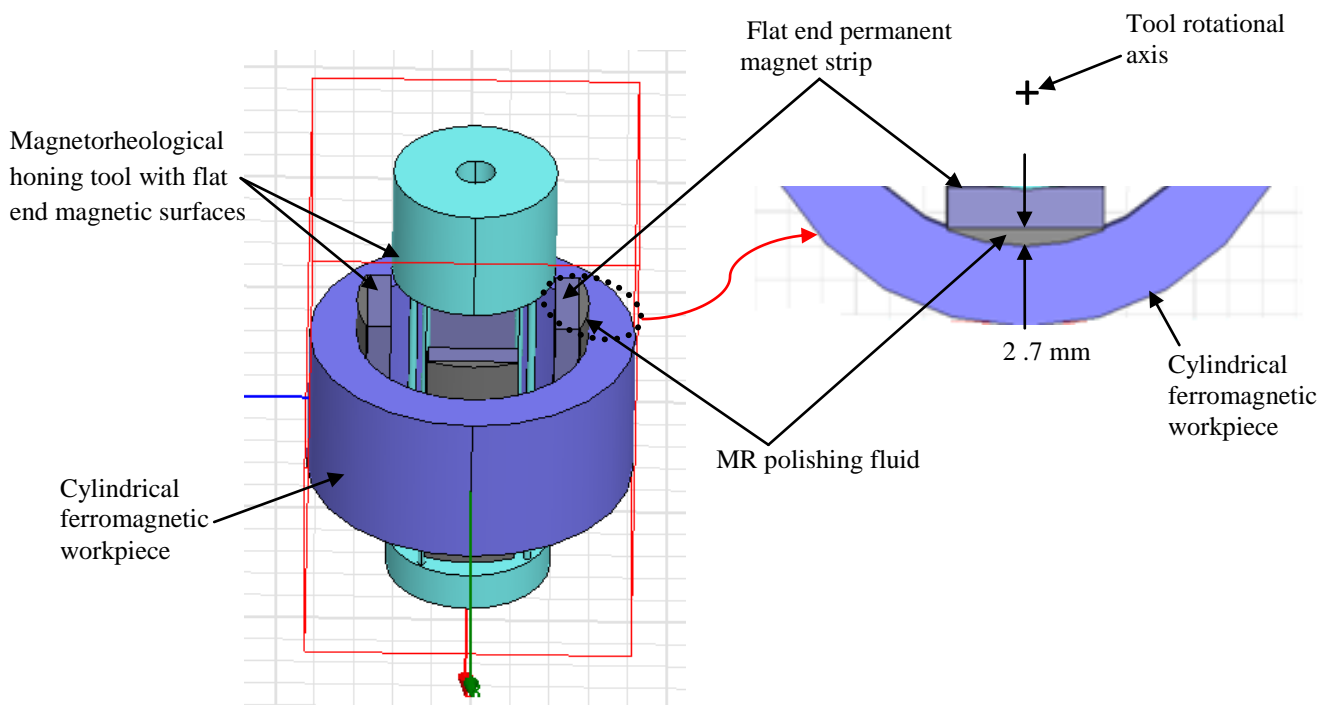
Magnetic model of the magnetorheological honing tool with the flat end magnetic surface, MR polishing fluid and the ferromagnetic cylindrical workpiece.
